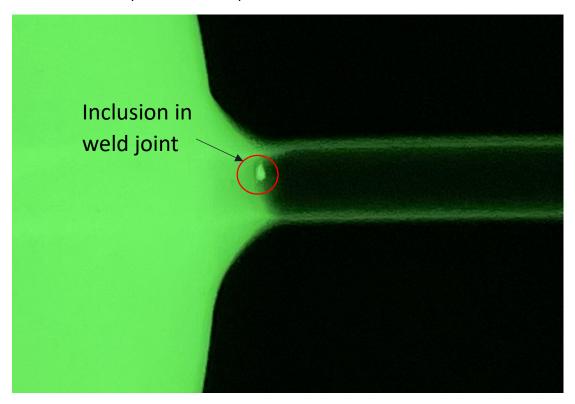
A radiographic inspection reveals an inclusion (flaw) in a weld. A fracture analysis can help determine whether or not to scrap the component.
